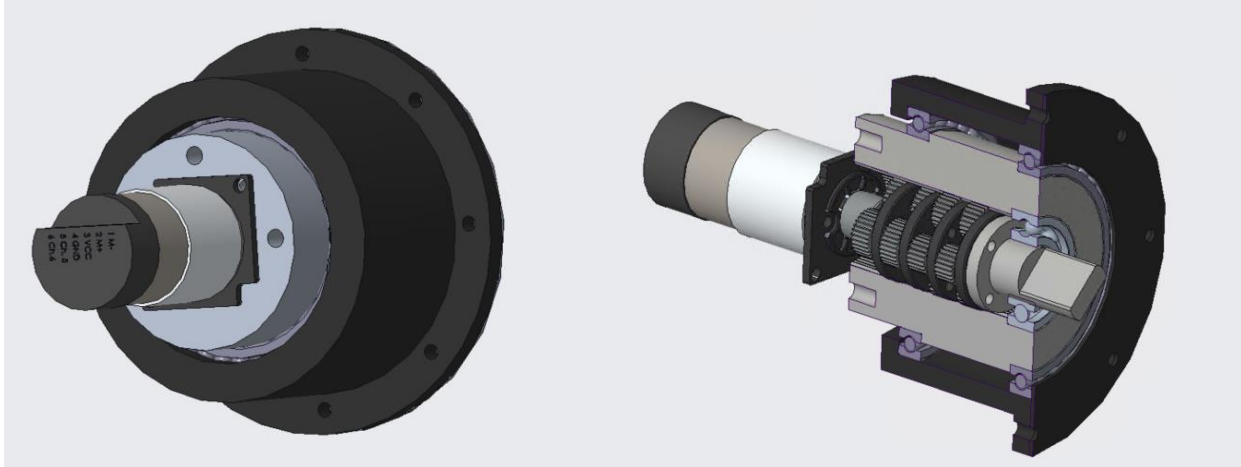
Gearbox and Wheel-Hub Combination Figure 23: Cross Section of Gearbox and Hub Combination
